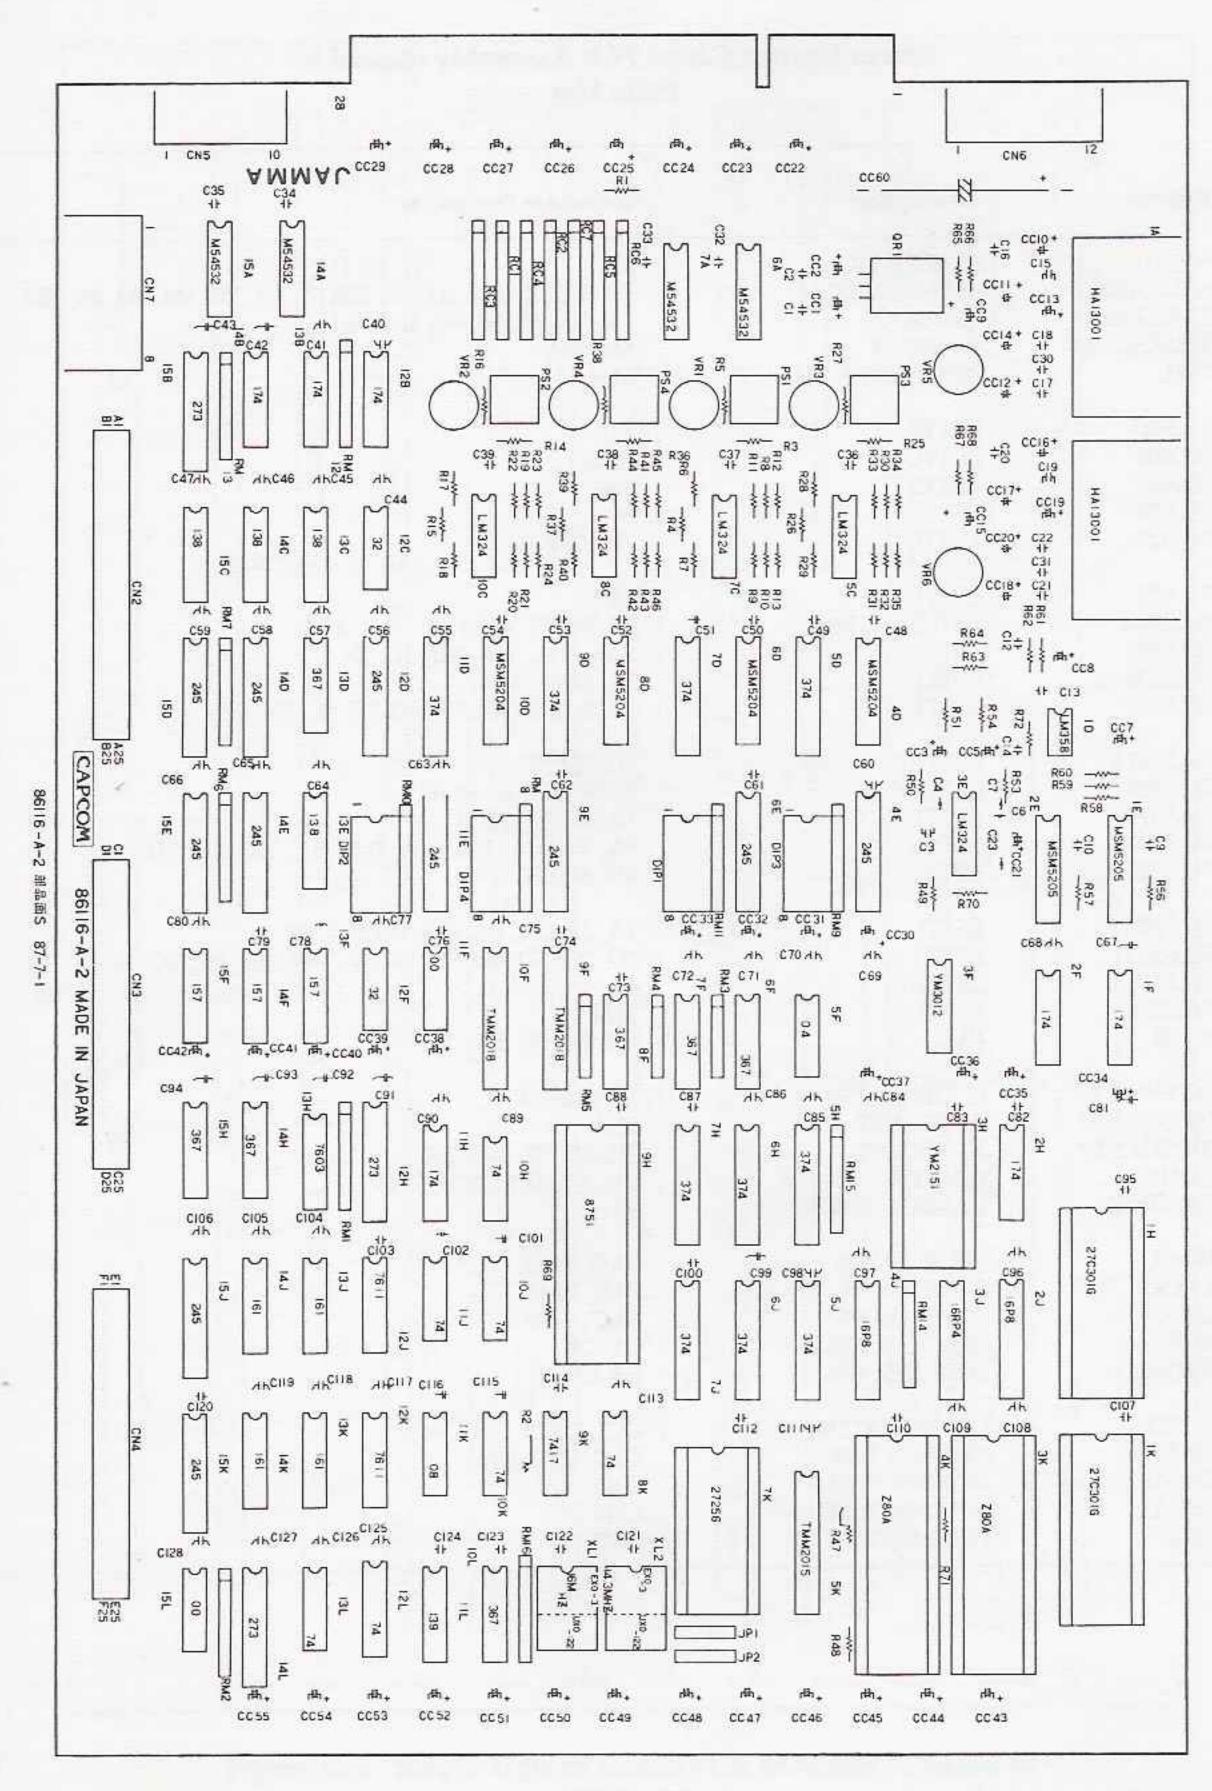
Street Fighter Game PCB Assembly (Board A) 86116-A
